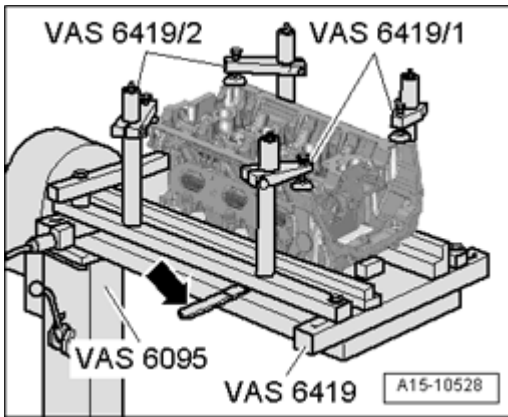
Tensioning Cylinder Head On Tensioning Element VAS 6419
